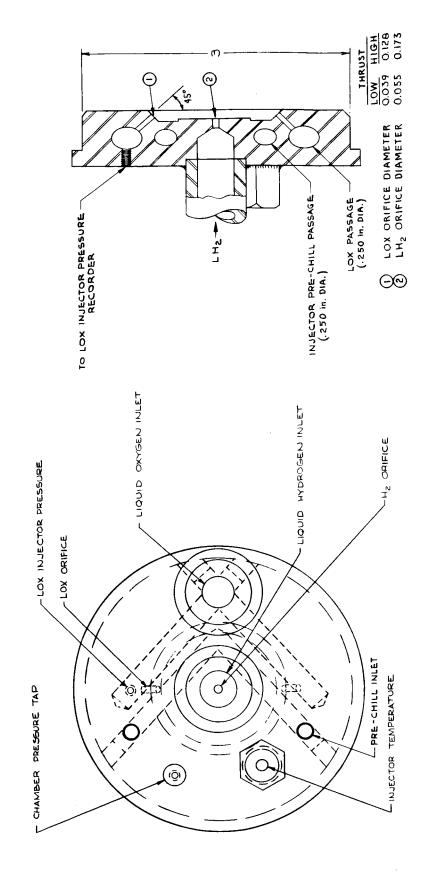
TRIPLET INJECTOR ASSEMBLY
